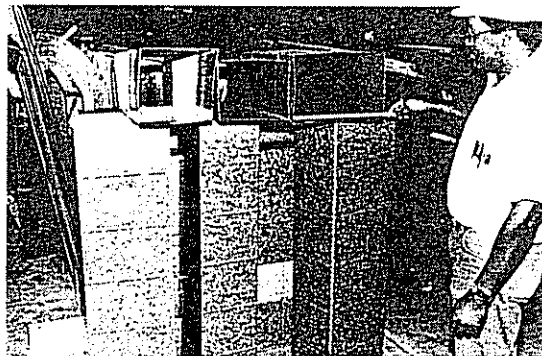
Sheet metal duct work (courtesy Ingalls Shipbuilding)
